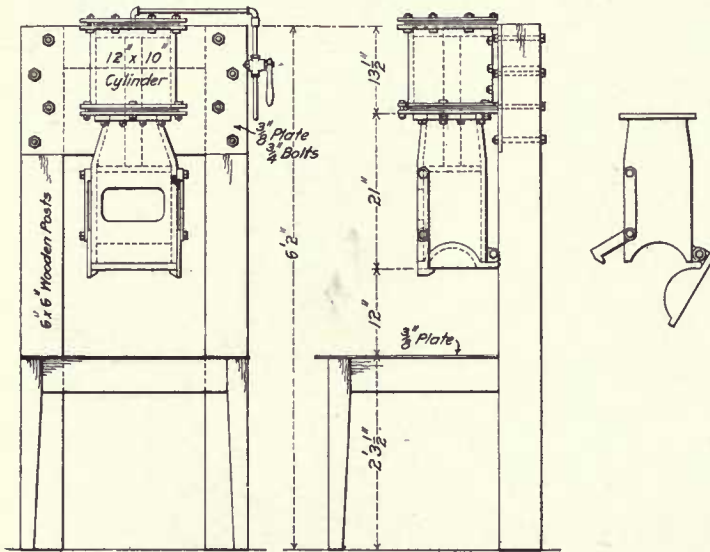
Press for Forming Grease for Driving Box Cellars.
